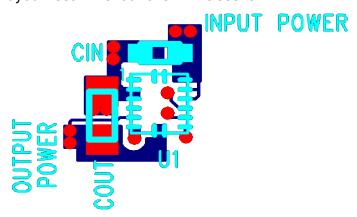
Top PCB Layer Critical Components and Copper for Minimum Footprint
